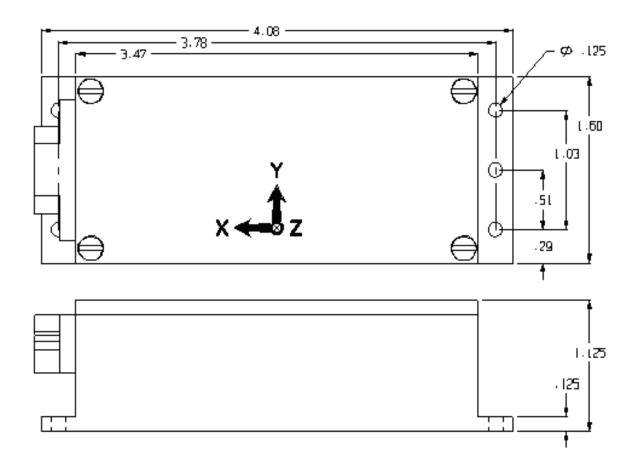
MODEL WFG-D-130 HIGH-SPEED DIGITAL 3 AXIS FLUXGATE MAGNETOMETER (DIMENSIONS ARE IN INCHES)
